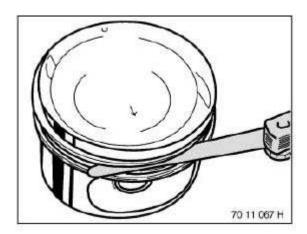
Identifying Piston Rings Groove Clearance Courtesy of BMW OF NORTH AMERICA, INC.
